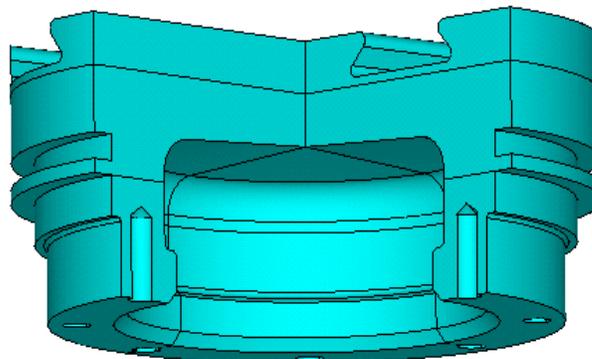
Cross section of shot piston in aluminum die casting equipment.
